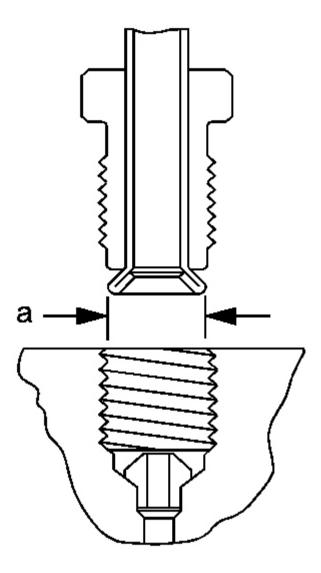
Identifying Correct Brake Pipe Flare Shape & Diameter Courtesy of GENERAL MOTORS CORP.
